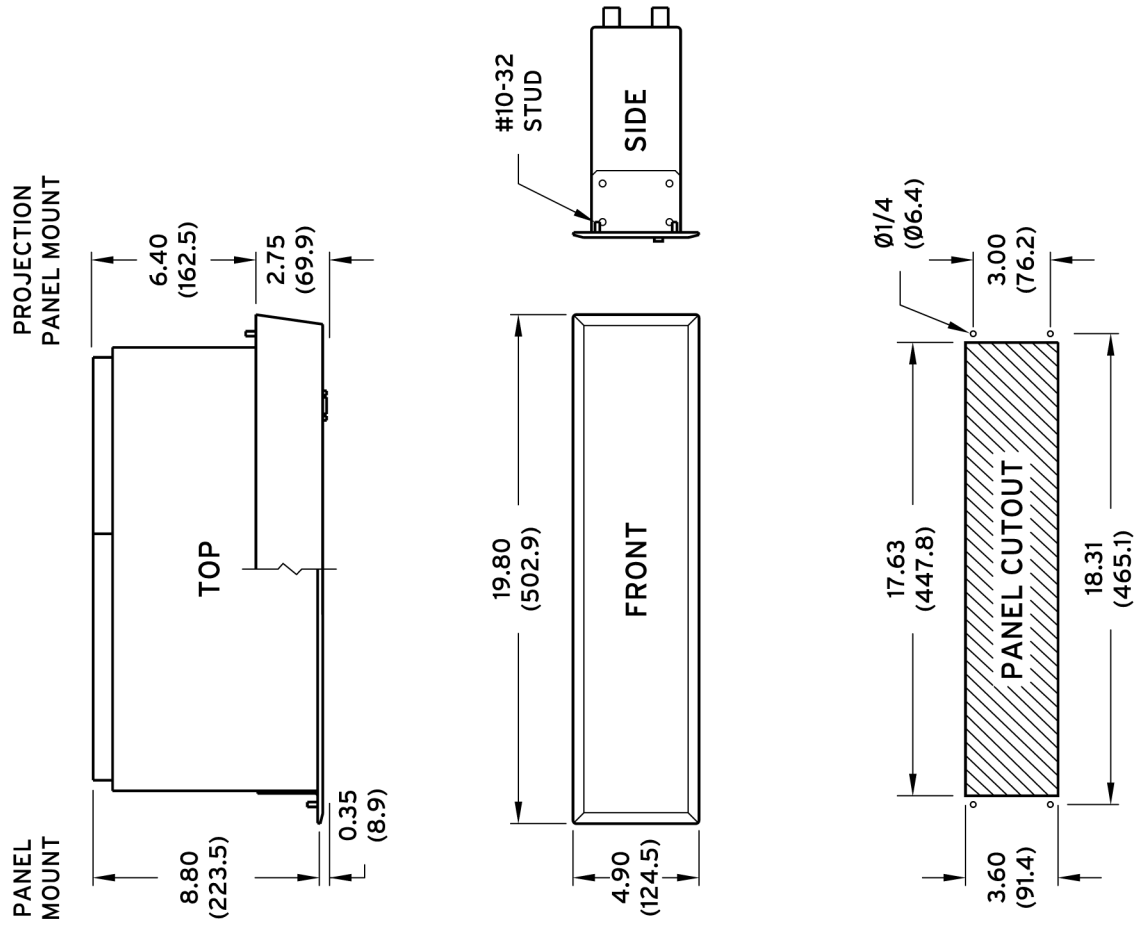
SEL-2100 Dimensions and Panel-Mount Cutout
